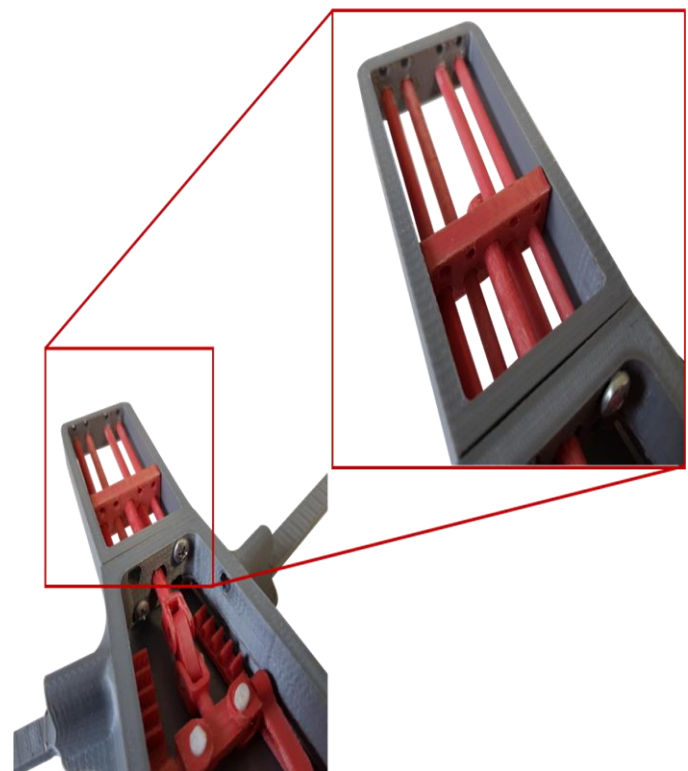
PLA physical mock-up: detail of the SMA spring assembly frame.
